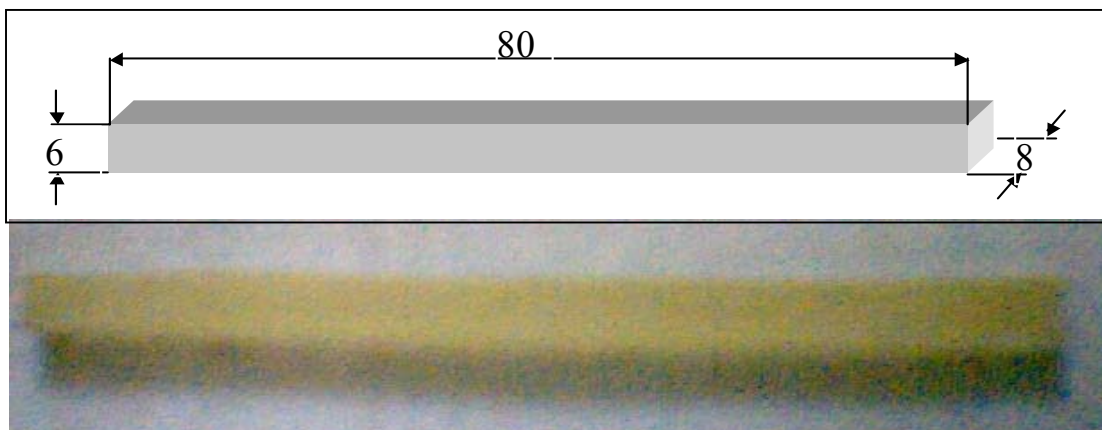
(a) Dimensions for torsion test specimen, (b) Photograph for pure and reinforced epoxy torsion test specimens.
